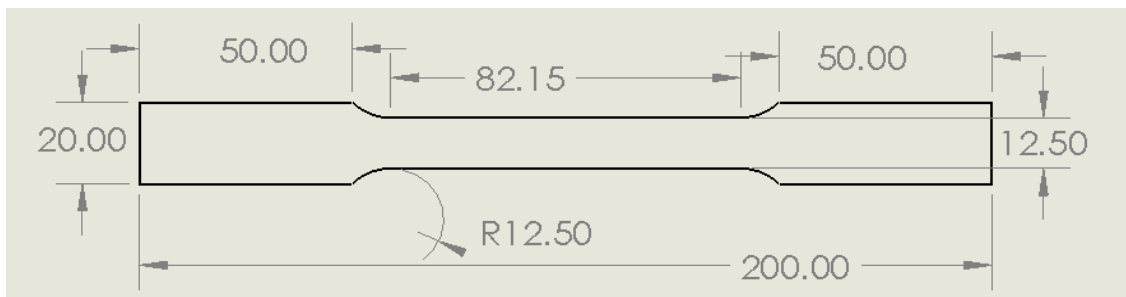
Design of Tensile test specimen as per ASTM-E8m.
